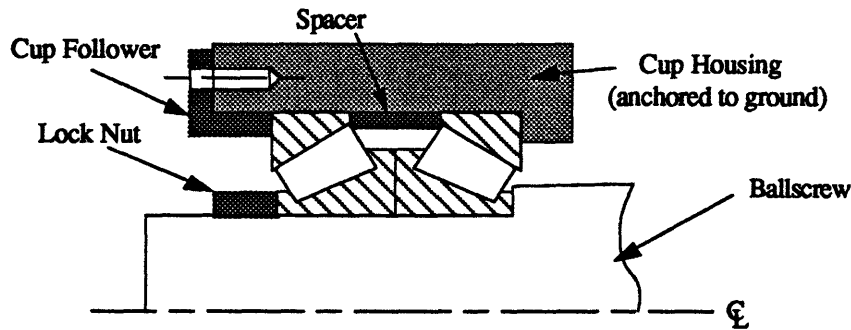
Tapered Roller Bearing Direct Mounting Scheme.
